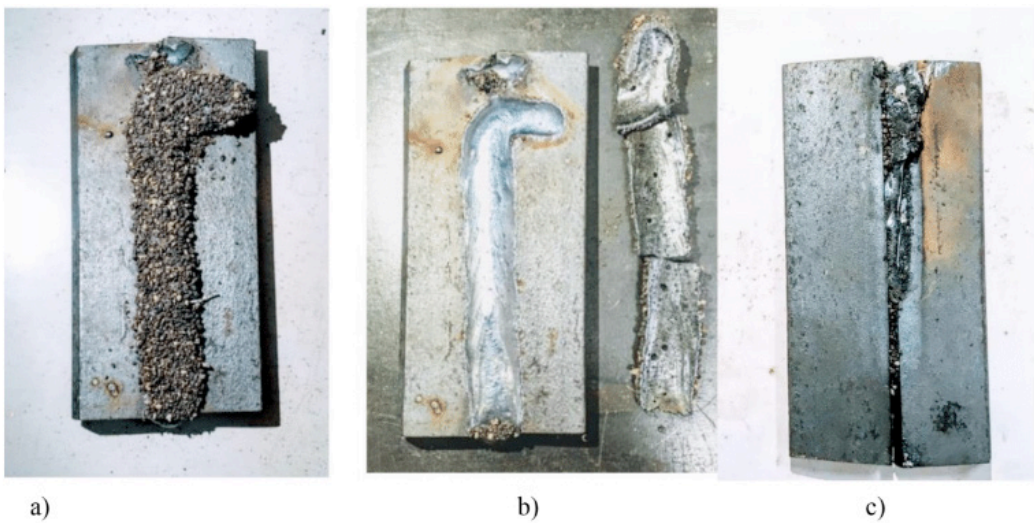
Welding on plate 400 A - a) with scum b) no scum c) background of the piece
